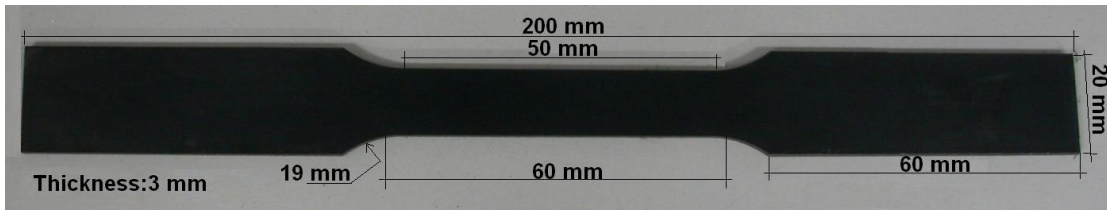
St-37 steel tensile test specimen machined according to ASTM E-8 and dimensions.
